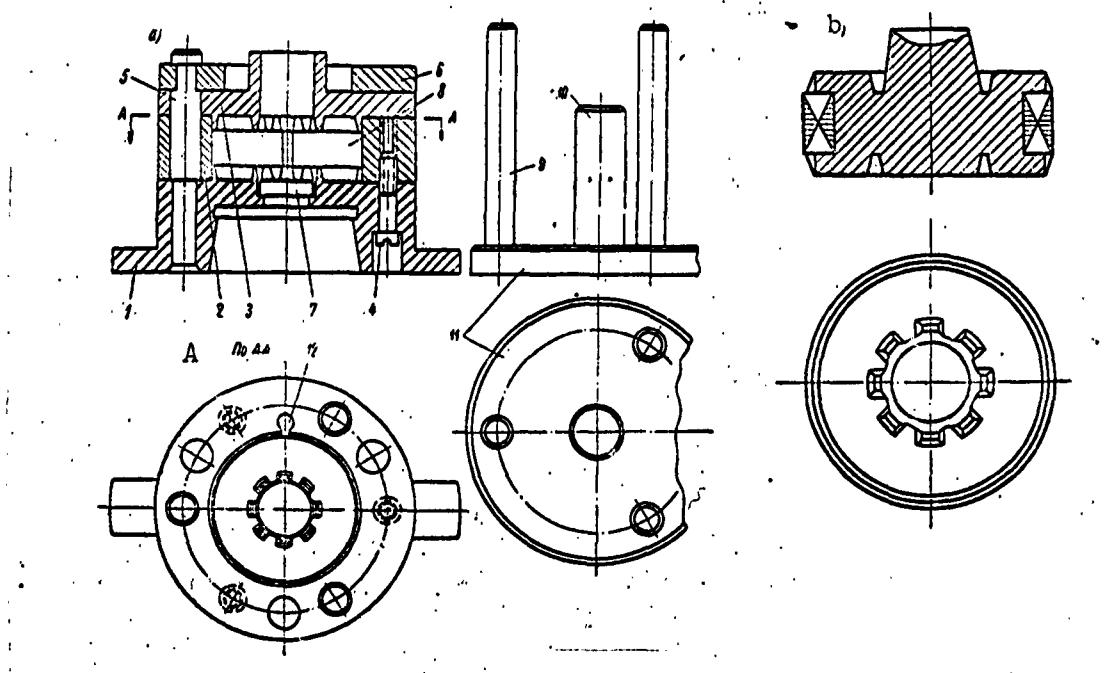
Centrifugal casting mold for shunt rotor winding (a). Invested iron packaged with shunt winding (b). A) Section through AA.
